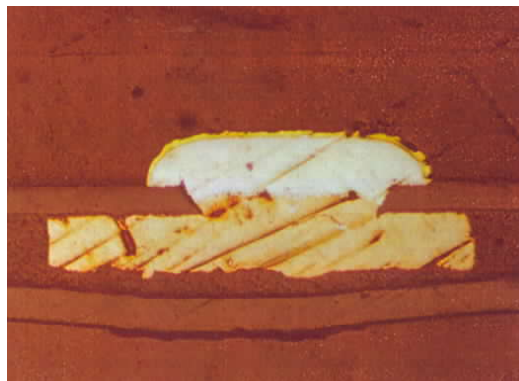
Cross Section of the Ni/Au Flat Disc Bump with the Copper Foundation
